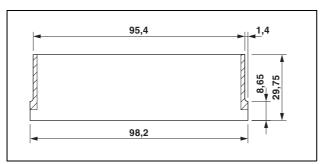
Dimensions of the PCB with housing cover ME-IO 18,8 C 9U 7035
